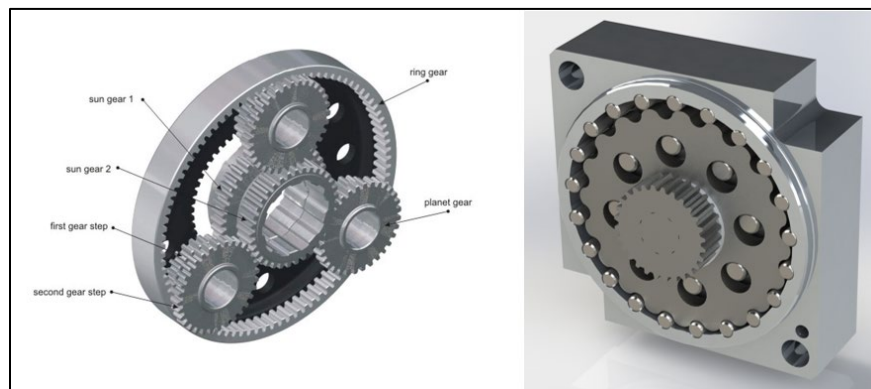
Planetary and Cycloidal Gears [3, 4]
